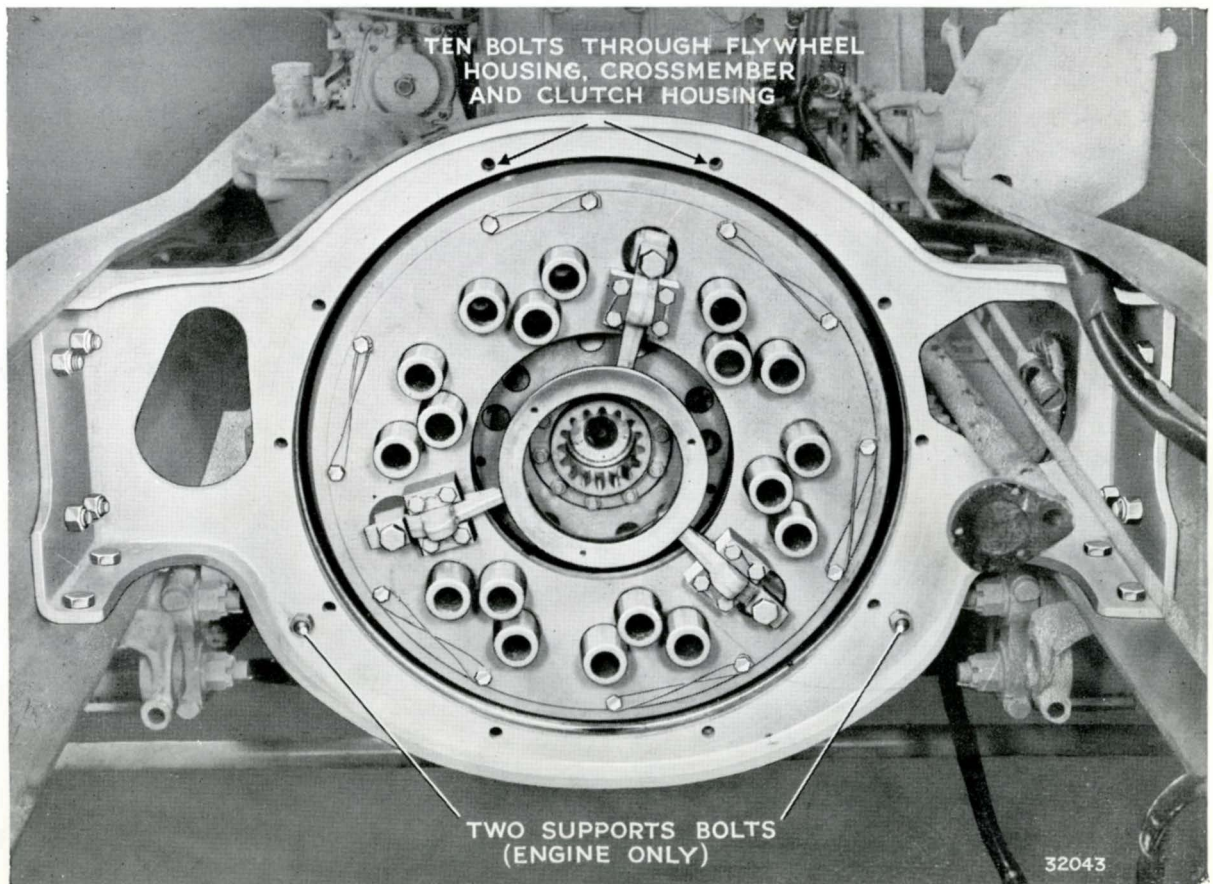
THE CLUTCH WITH GEARBOX REMOVED ON THE HEAVY GOODS VEHICLE
